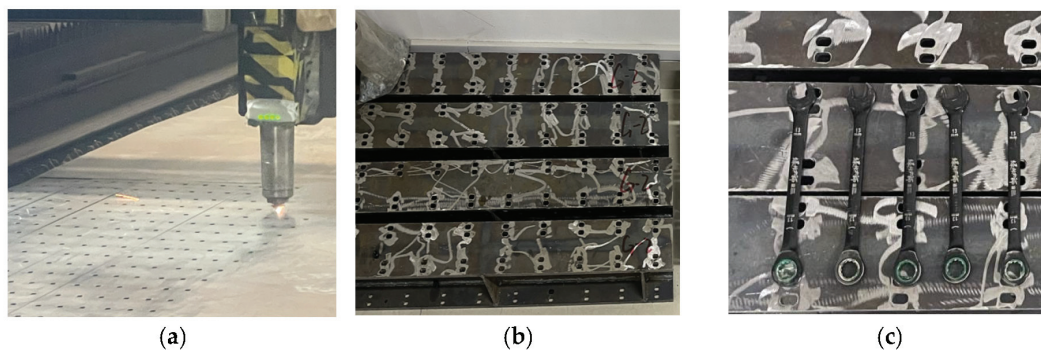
Specimen preparation. (a) Hole Drilling; (b) Grinding and Rust Removal; (c) Installation Using Torque Wrench.
